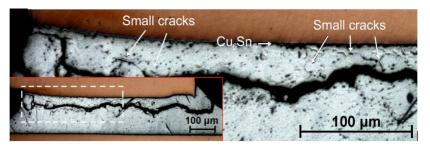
A ductile fracture of SnAgCu solder interconnection subjected to mechanical vibration.
